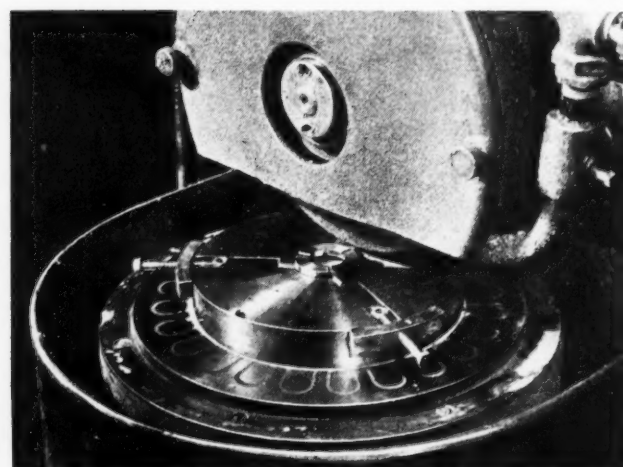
Grinding One Side of a Thrust Collar to Obtain the Desired Fit in Assembling a Machine Unit
